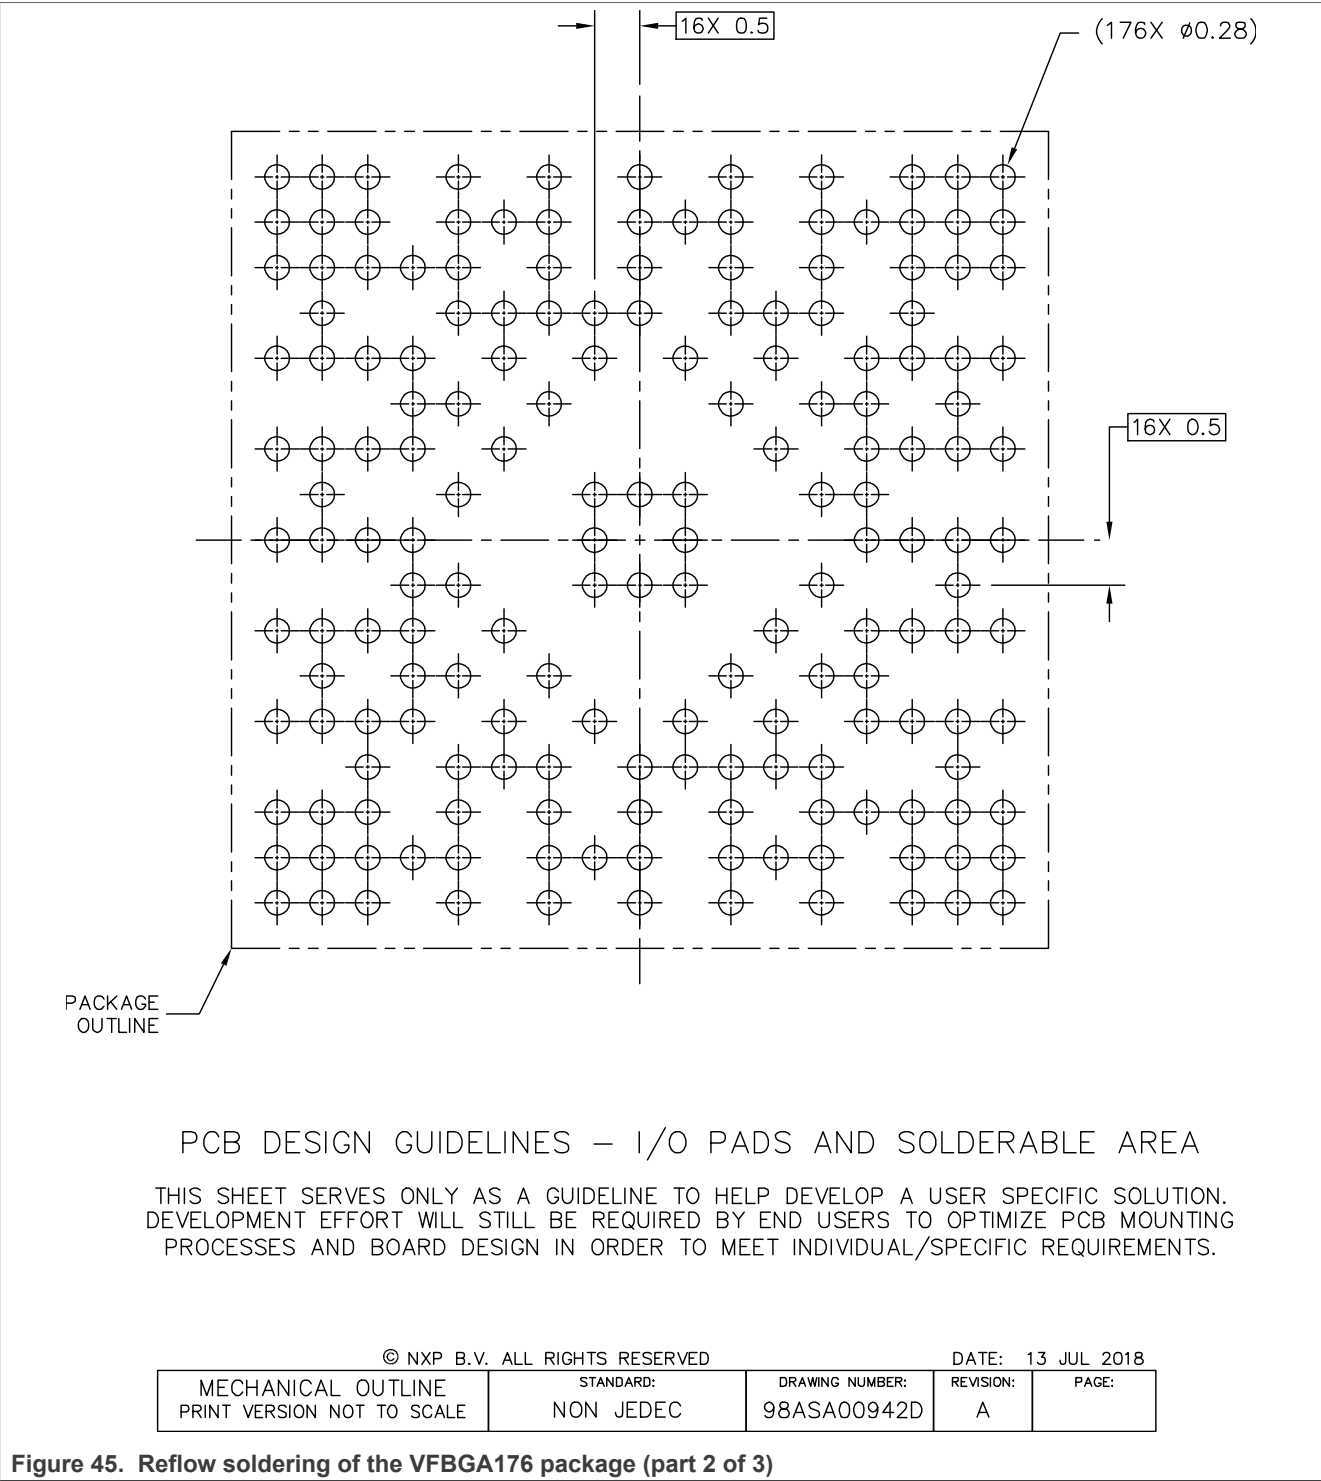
Reflow soldering of the VFBGA176 package (part 2 of 3)
